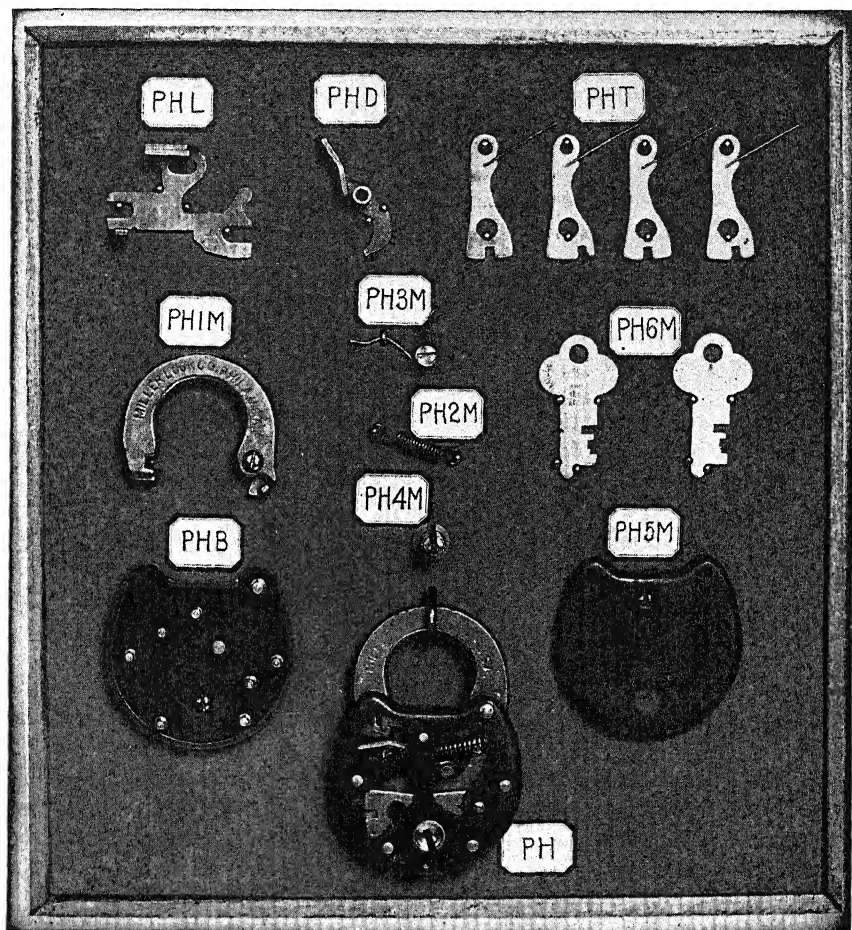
A 2½-in. Heavy Duty Padlock. Finished lock (with front cut open), sub-assemblies and components entering into final assembly. (The symbols used are not those of the Miller Lock Company, manufacturers of the lock, this lock having been selected to illustrate mnemonic nomenclature and routing because of its extreme suitability.)
